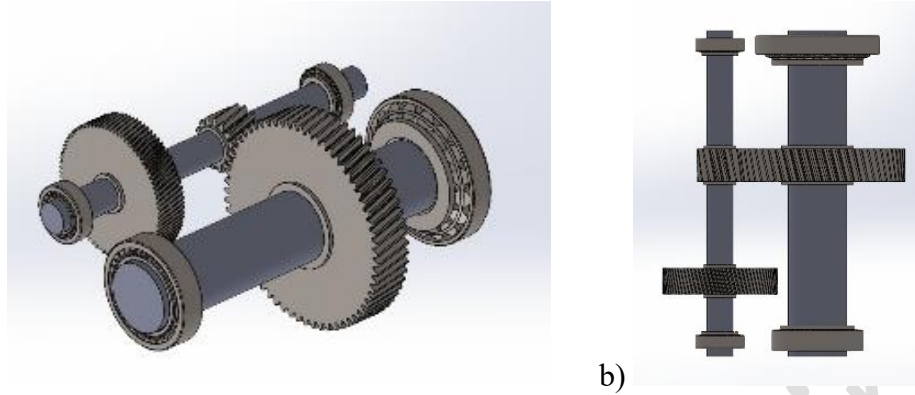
Aligned positions of the output shaft and second idler shaft: a) Isometric view, b) Top view
